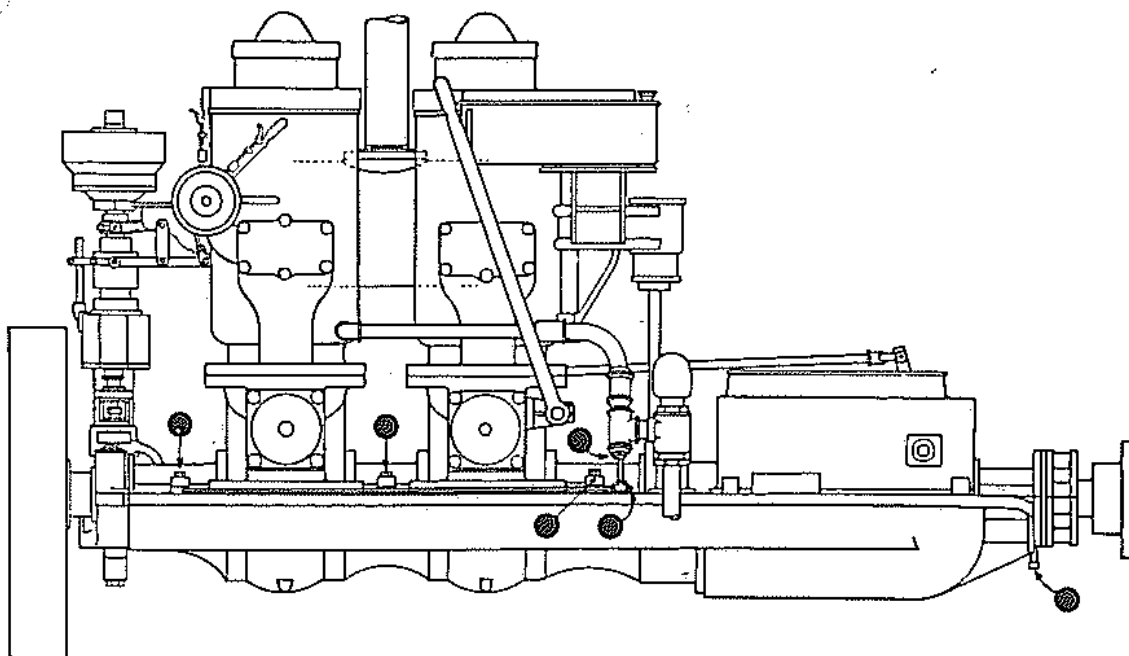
Draining of Cylinder and Bearing Water Jackets.
